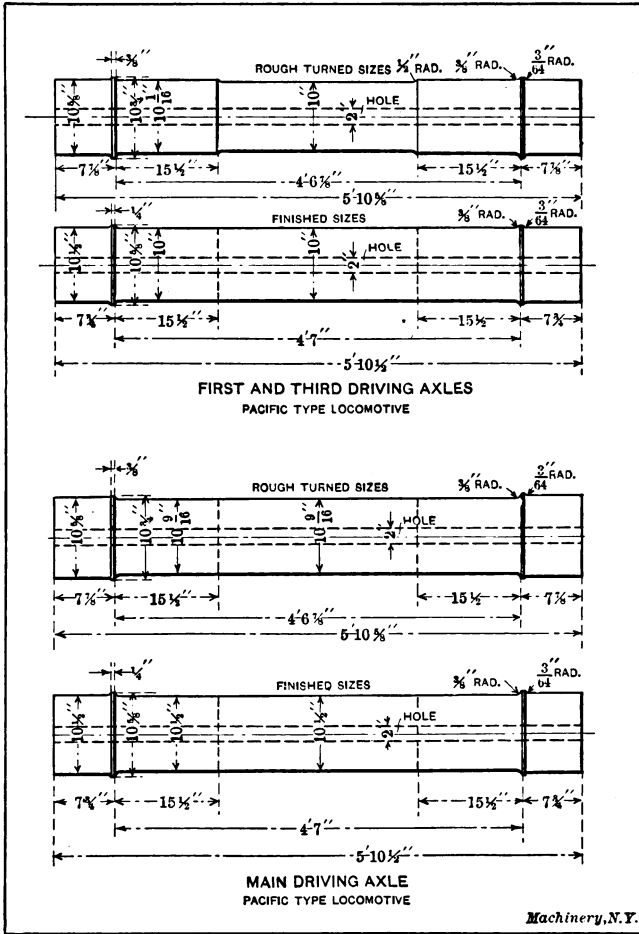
Rough and Finished Turned Dimensions for Driving Axles
